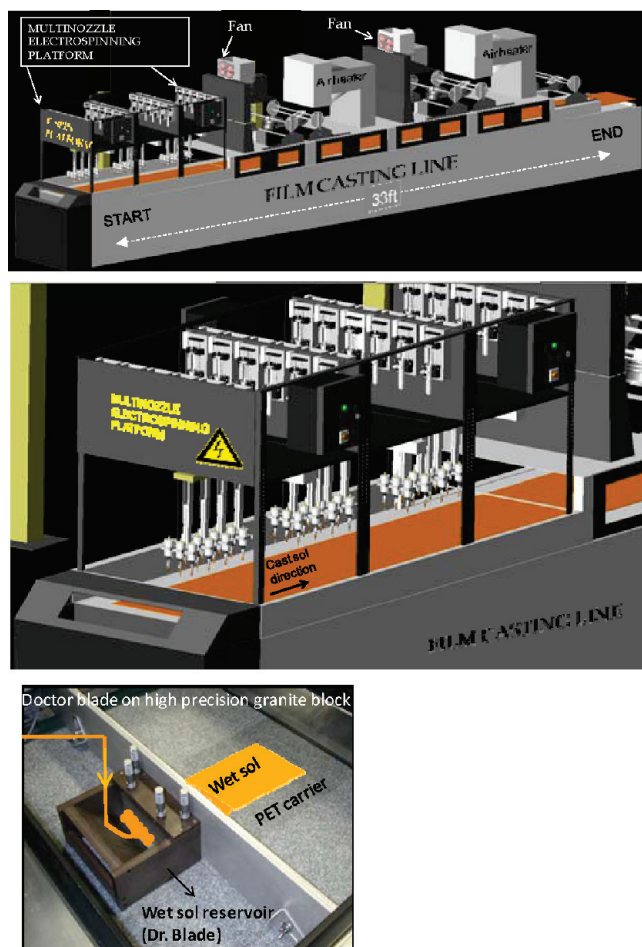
Manufacturing platform: (a) full view of the film-casting line equipped with a multinozzle electrospinning platform; (b) multinozzle spinning area; (c) wet sol casting.
